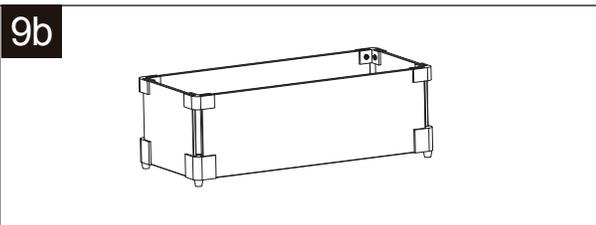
Repeat step 9a to assemble the remaining glass sides to complete the enclosure. Tighten all screws (E) with bolt driver (F).
